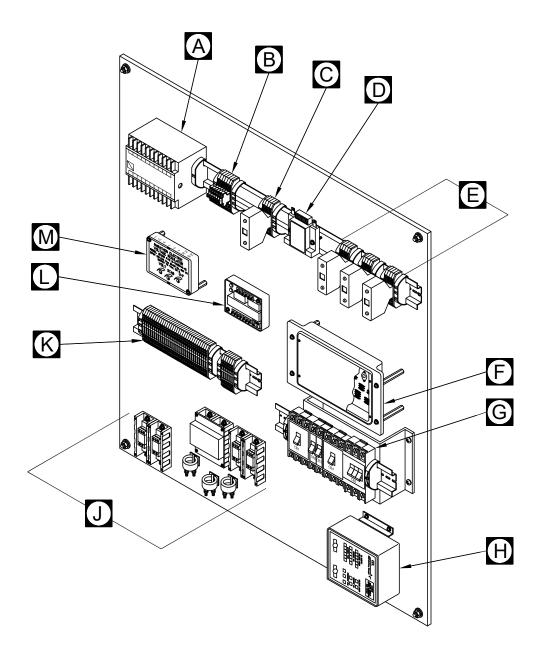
Barrier Panel Assembly (Sheet 1 of 7).
